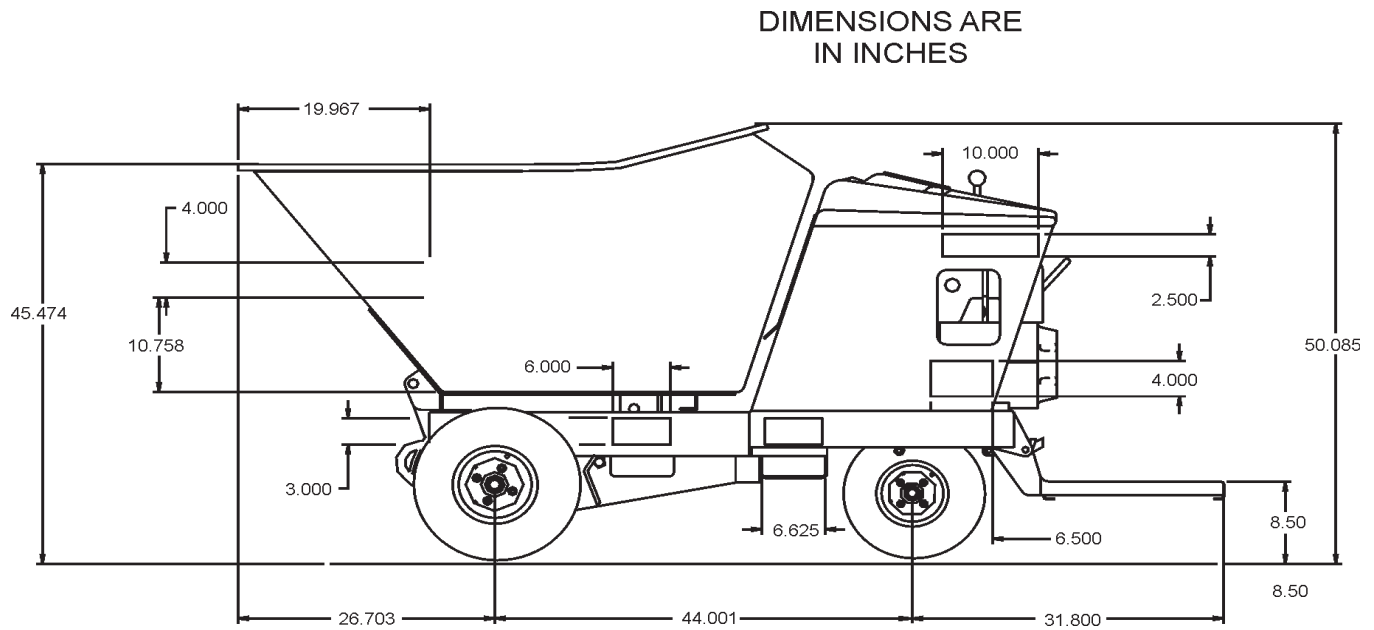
WPB-16 Power Buggy Dimensions (Side-View)
